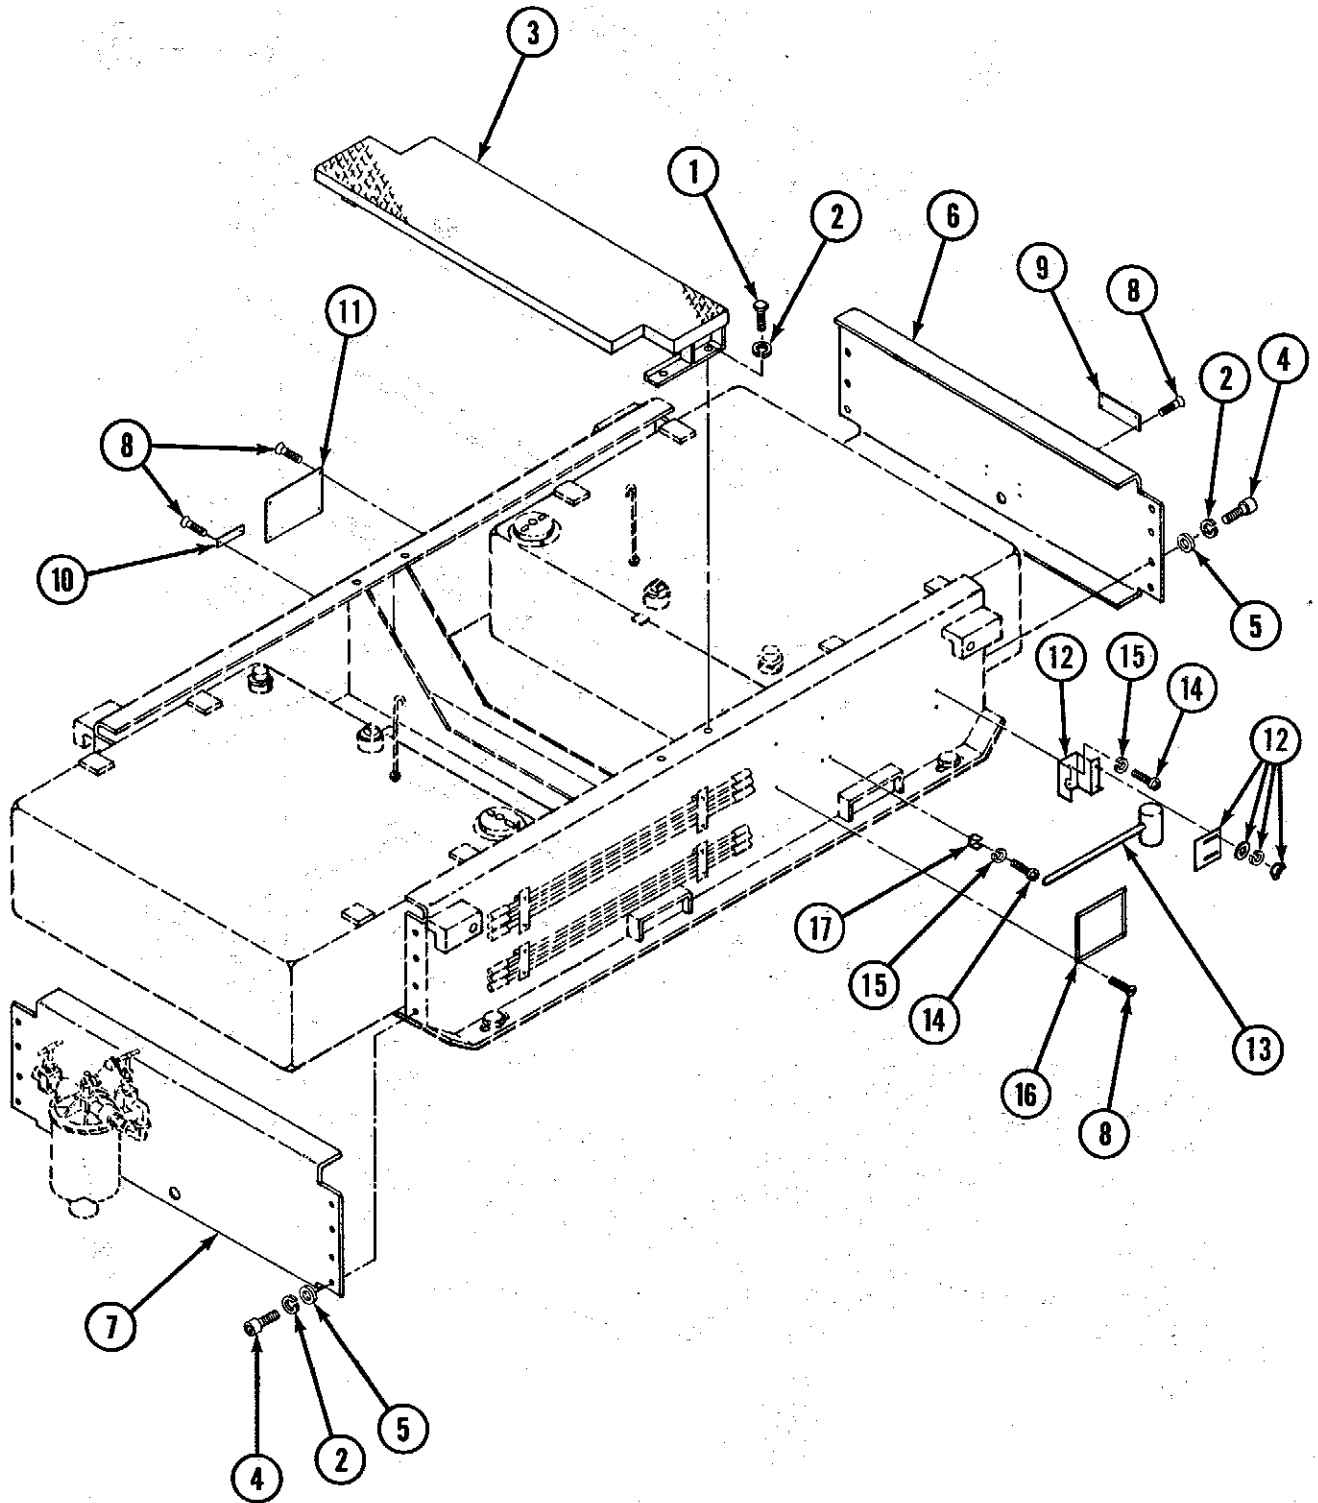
Pallet Assembly (Sheet 1 of 2)
